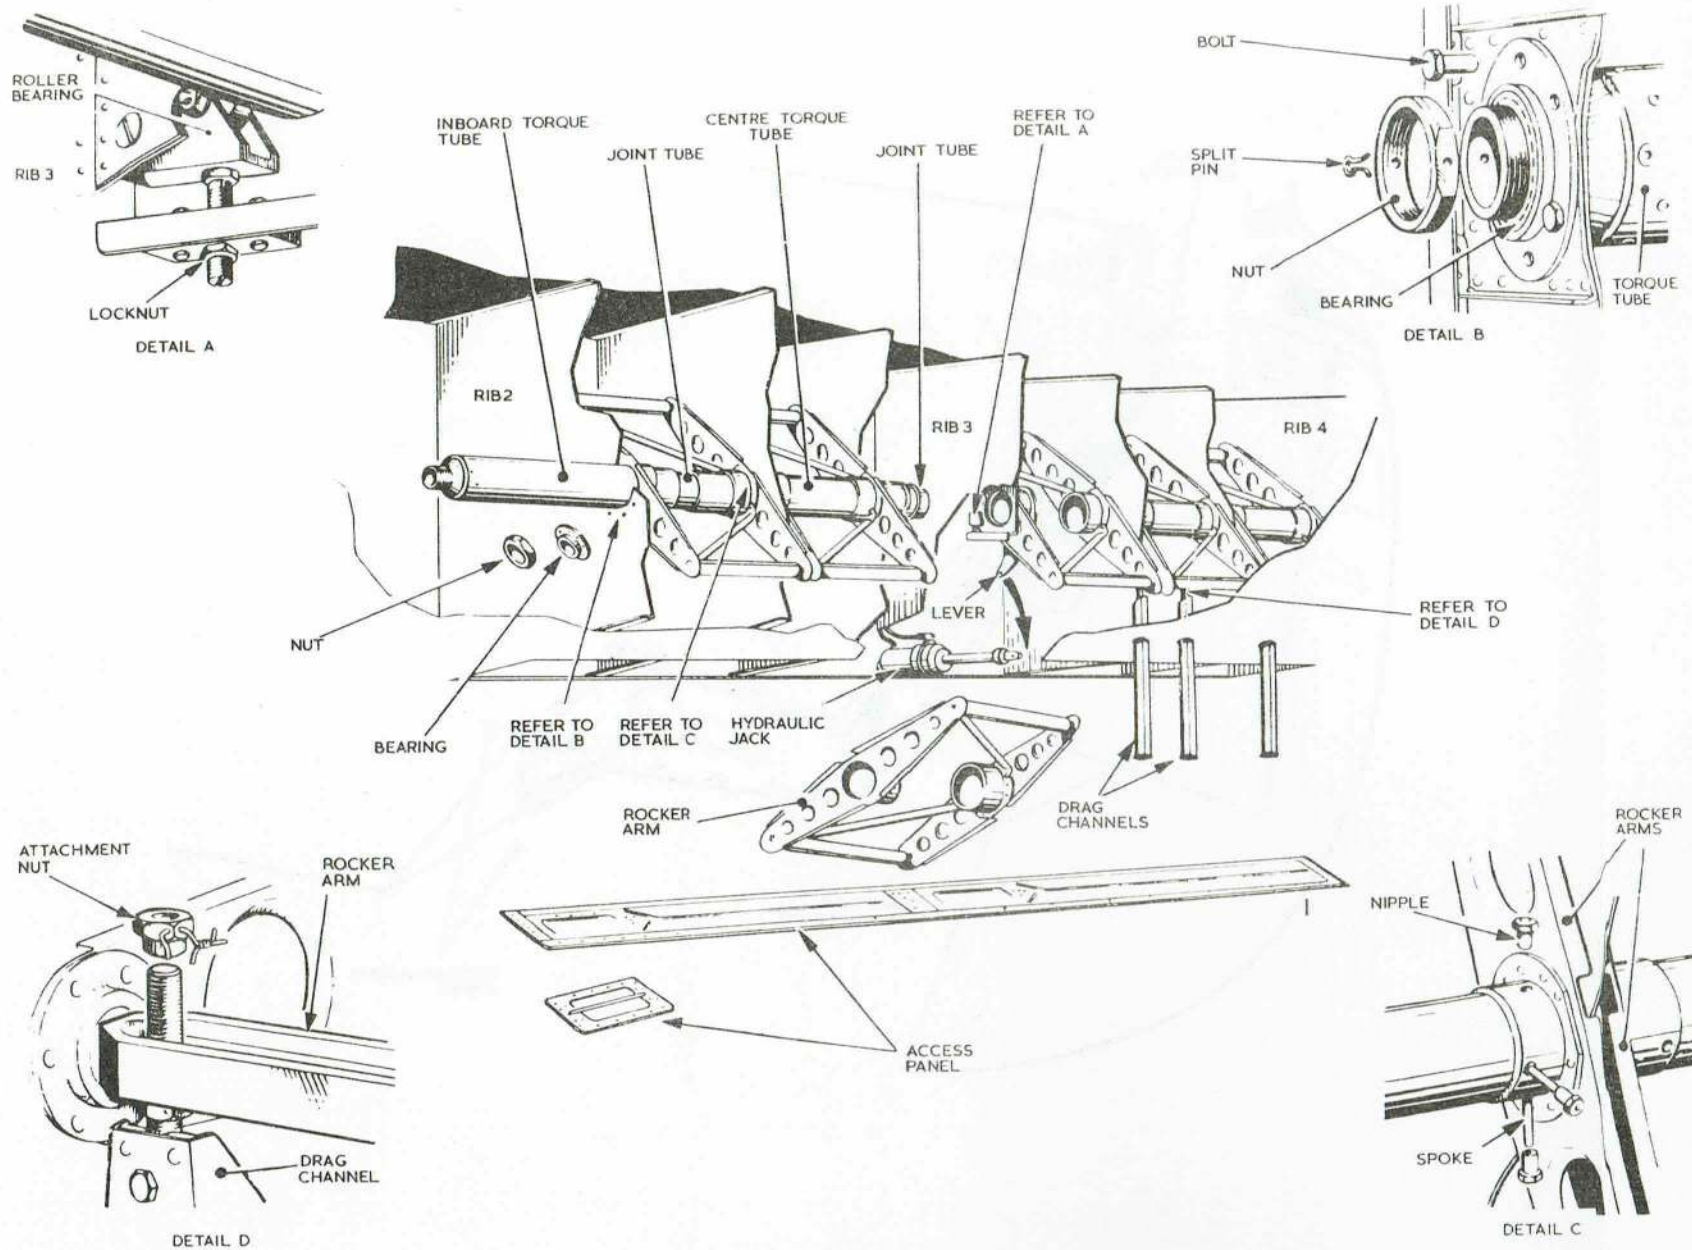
FIG.II. AIR BRAKES REMOVAL AND ASSEMBLY
